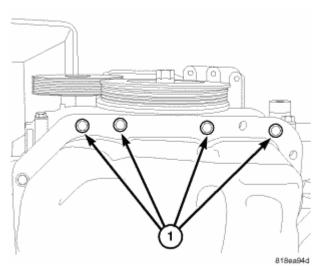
Timing Chain Cover Lower Bolts Courtesy of CHRYSLER LLC
